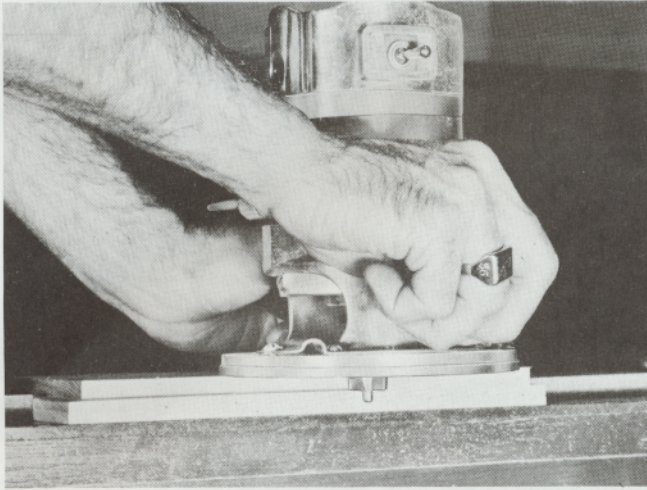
Pilot tip on cutter controls the cut. Apply light pressure between tip and material. Too much pressure will cause burn marks.
